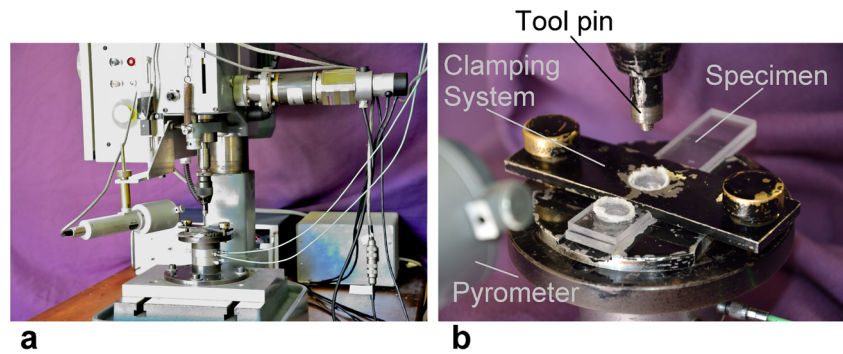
a Schematic representation of FSSW tool and b clamping equipment near the welding region
